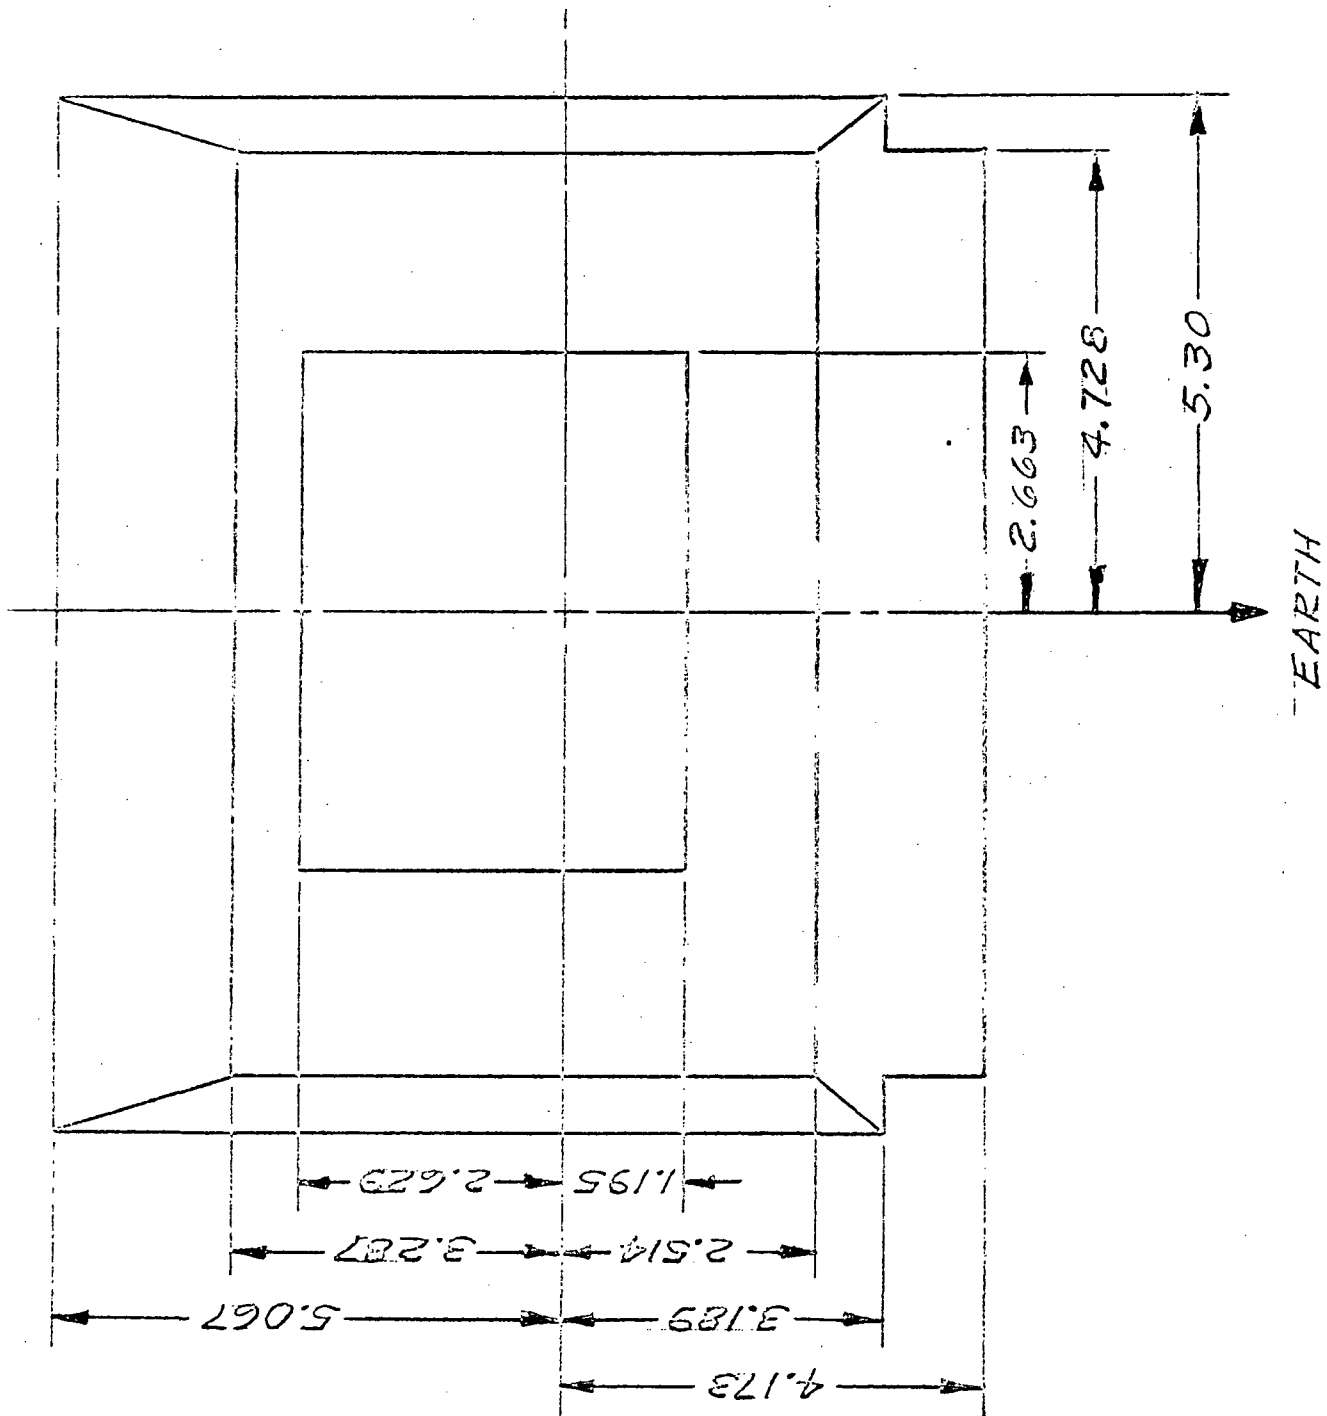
Top View of Shield & Cone End, Final SCMR Design
